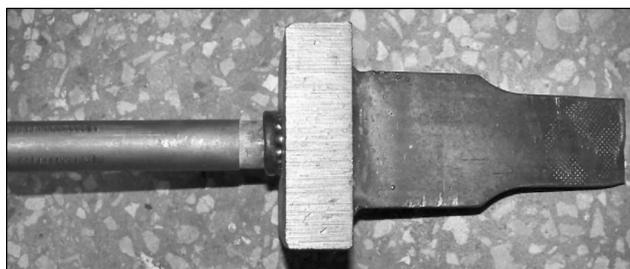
View of welded mock-up specimen for fatigue testing with prismatic gripping part
